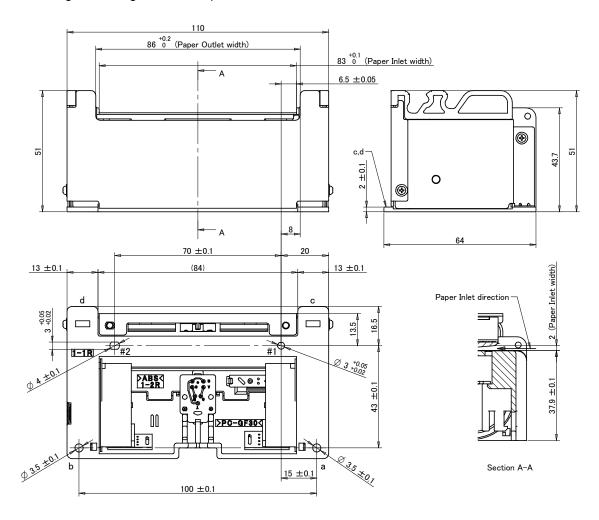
Dimensions for Positioning and Securing the Printer Main Body
